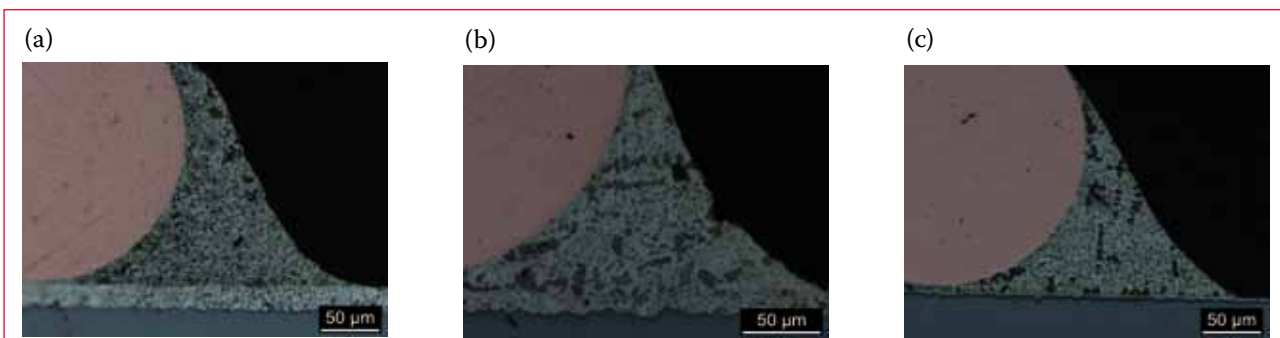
Cross sections of soldered Cu wire in cell metallization pads, and their main fracture mode after the pull test: (a) screen printing, 250µm Cu wire; (b) screen printing, 300µm Cu wire; (c) Ag plating, 250µm Cu wire.
